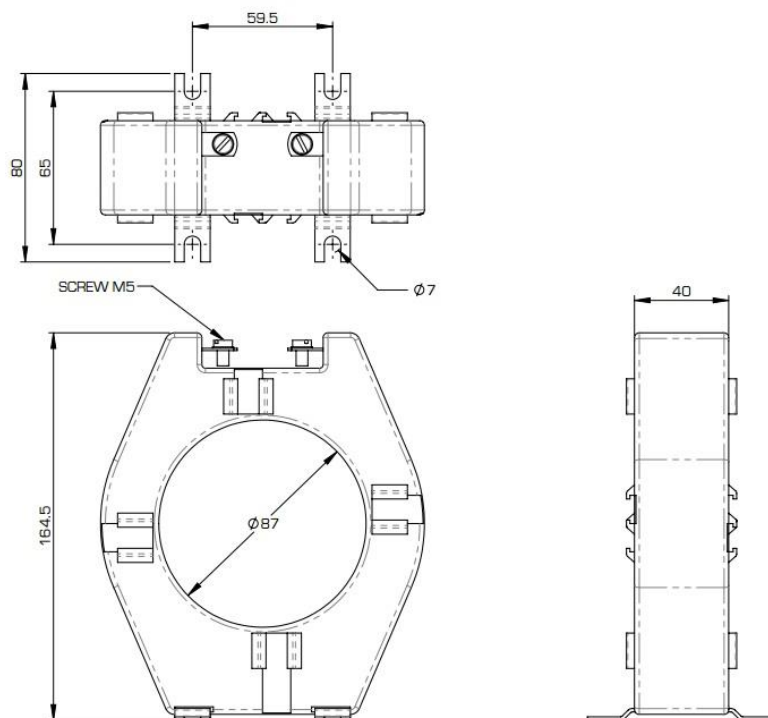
Current Transformer 88 mm I.D. (Part: 101703) Dimensional Details
